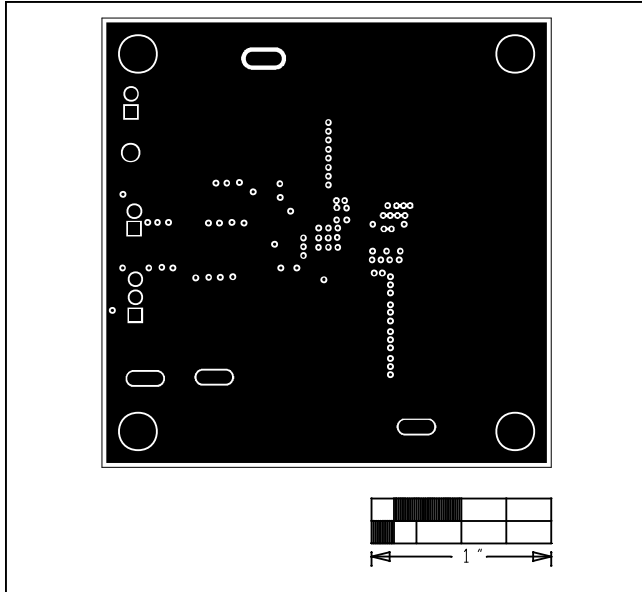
MAXM17544 EV Kit PCB Layout—PGND Layer 2
